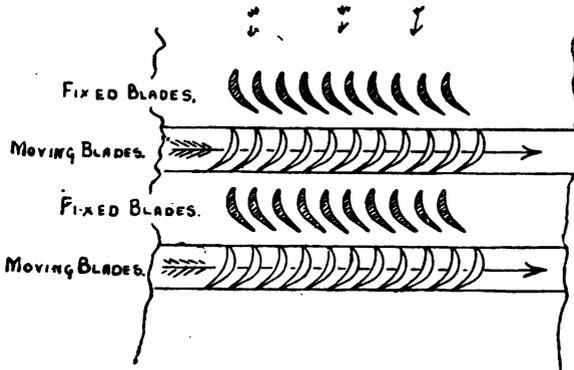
BLADES OF PARSONS' STEAM TURBINE.
